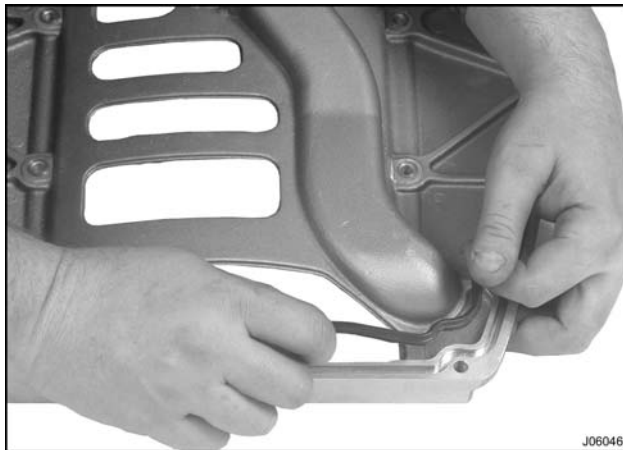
Upper oil pan gasket installation (lower face) (typical)
